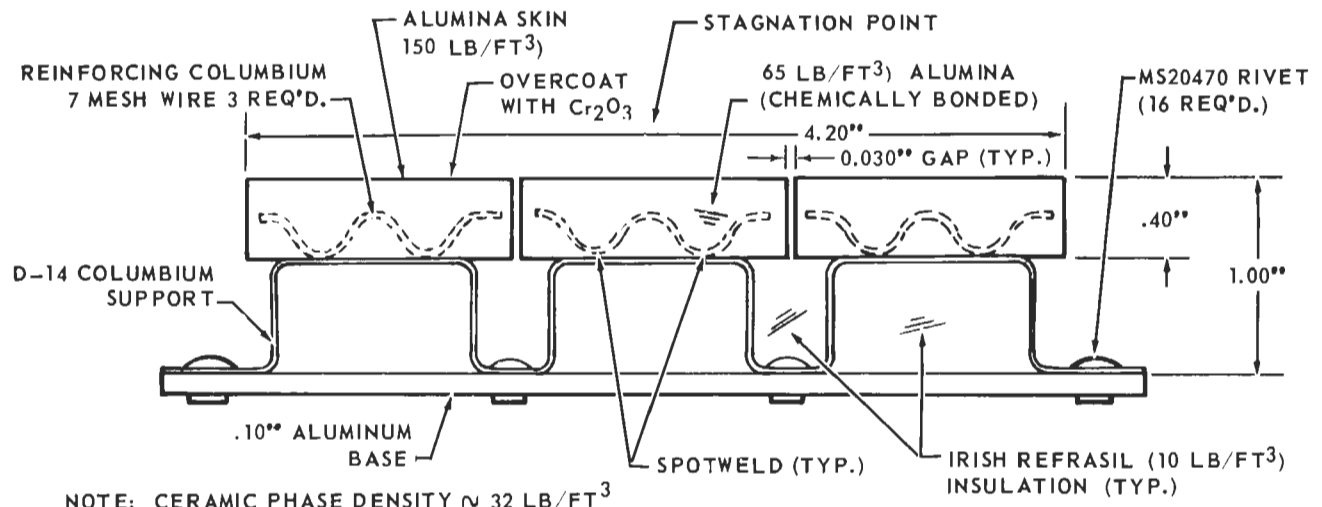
3400°F TEST SPECIMEN - 3.0 INCH RADIUS LEADING EDGE - REINFORCED CASTABLE ALUMINA DESIGN
